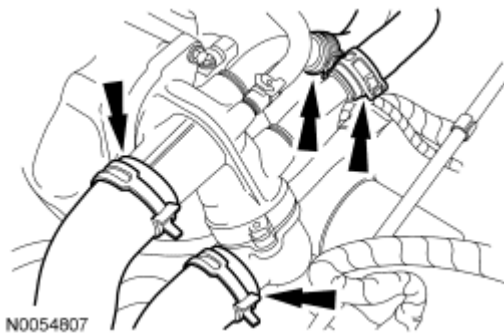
Locating Upper Radiator Hose, Lower Radiator Hose & Heater Hoses From Thermostat Housing
